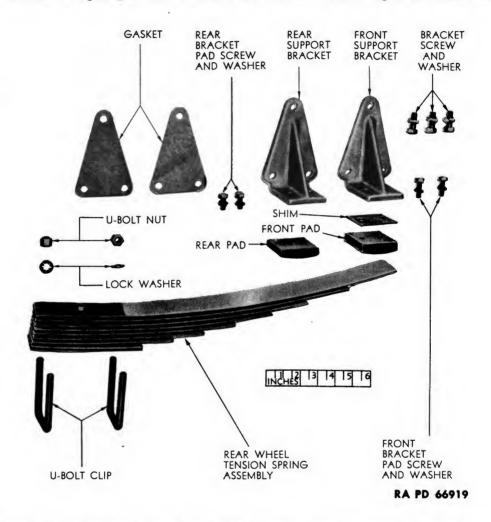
Parts of the Rear Wheel Spring and Support Brackets
